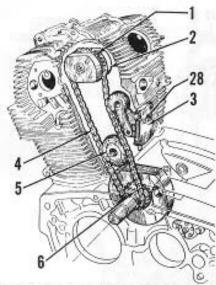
Cut-away view showing timing chain arrangement.
